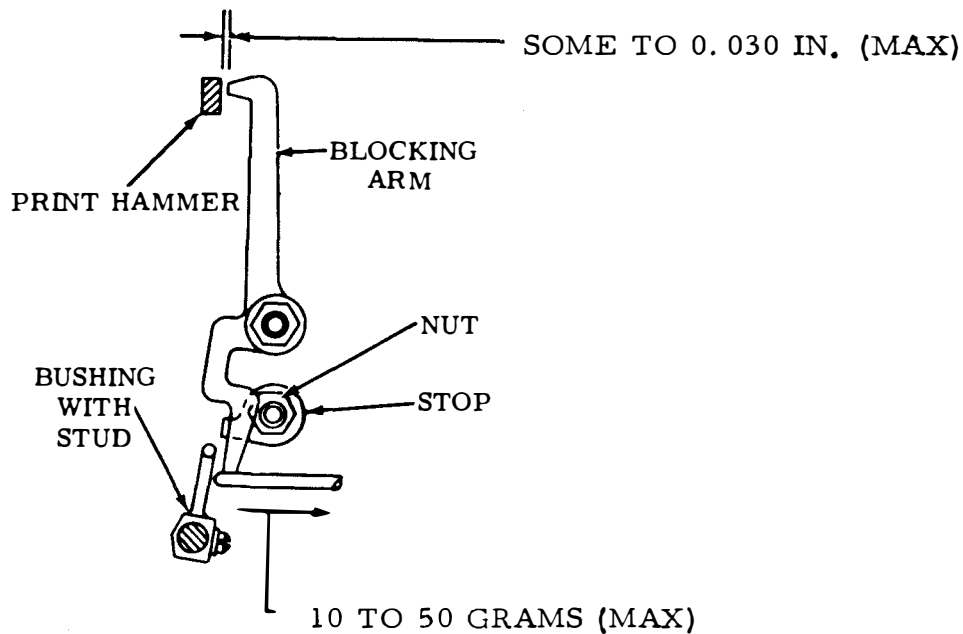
Print Suppressor Stop and Blocking Arm Spring - Rear View
